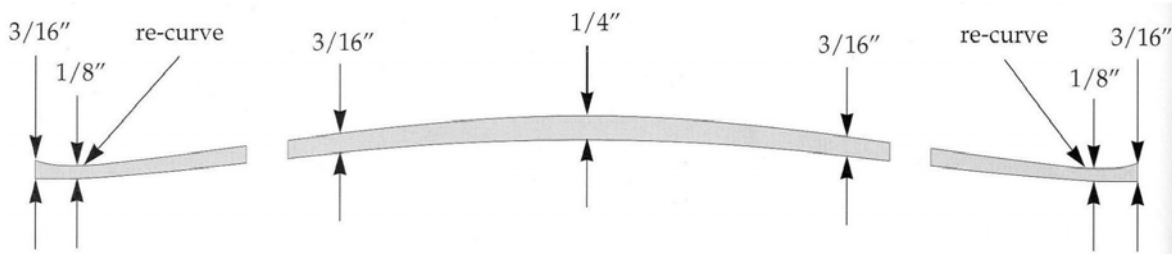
Longitudinal cross section of arched plates (Benedetto, 1994)
